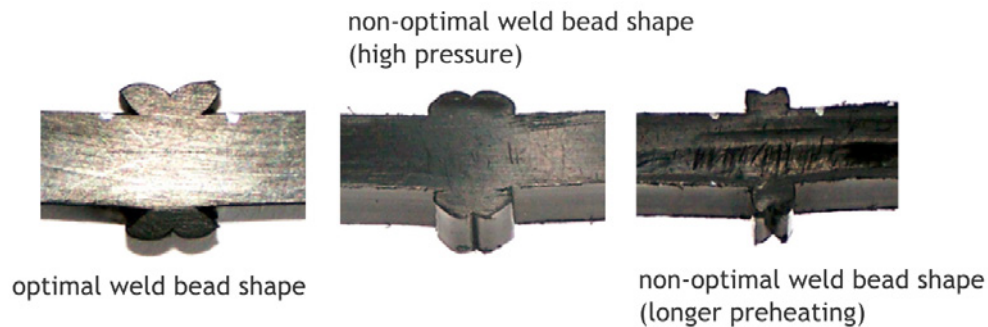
Different weld bead shapes for optimal and non-optimal welding conditions
